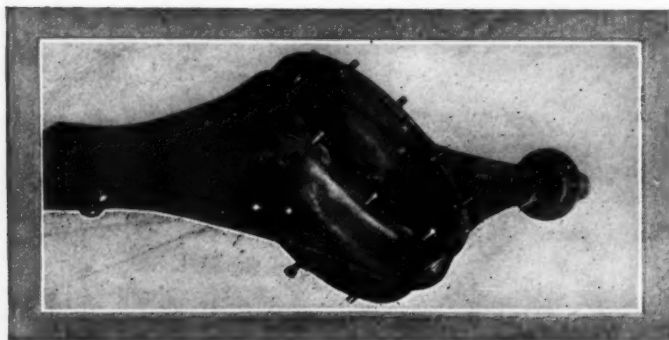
Pressed steel housing of the rear axle in perspective looking into the cavity that is formed out of the metal for the holding of the mechanism
